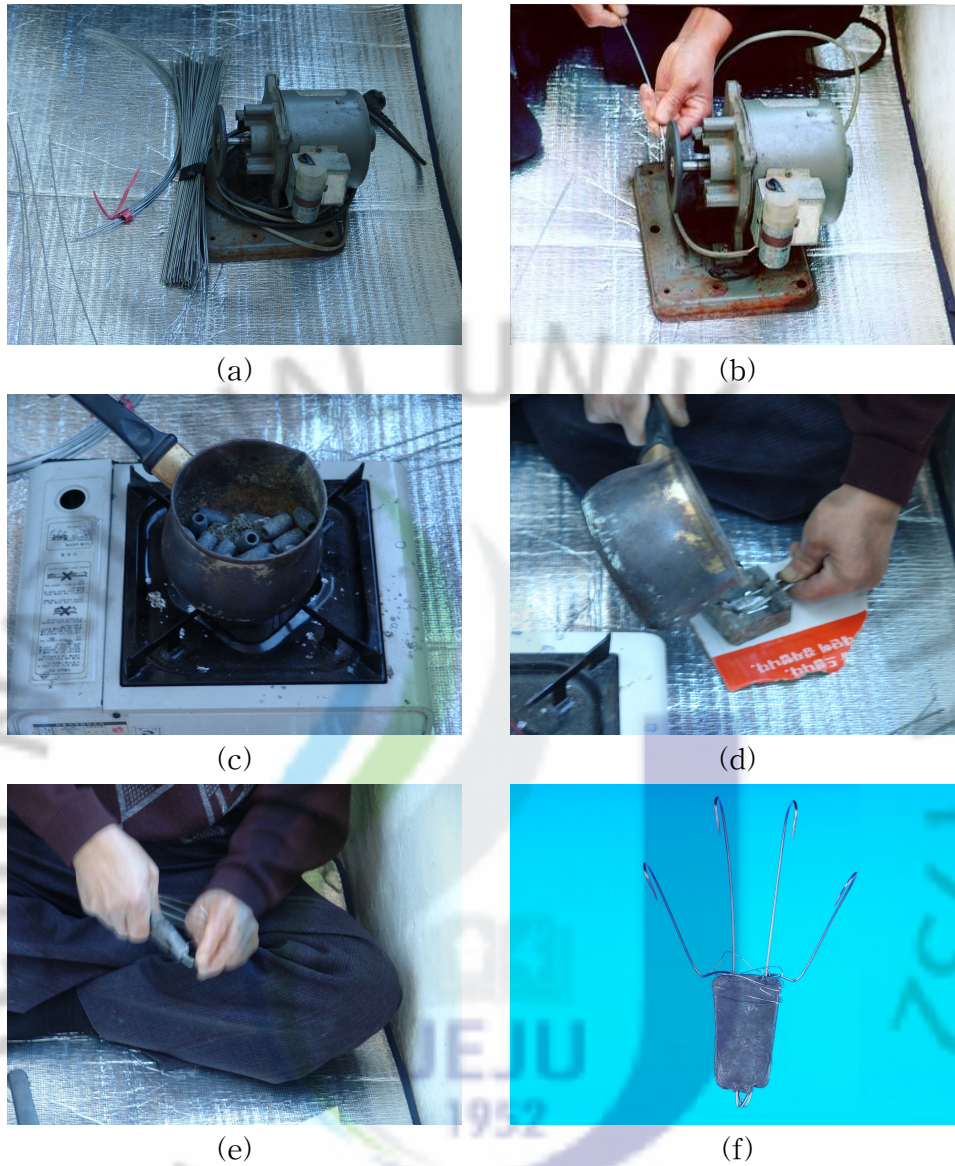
Fishing gear manufacture with the handiwork of fisher men.
